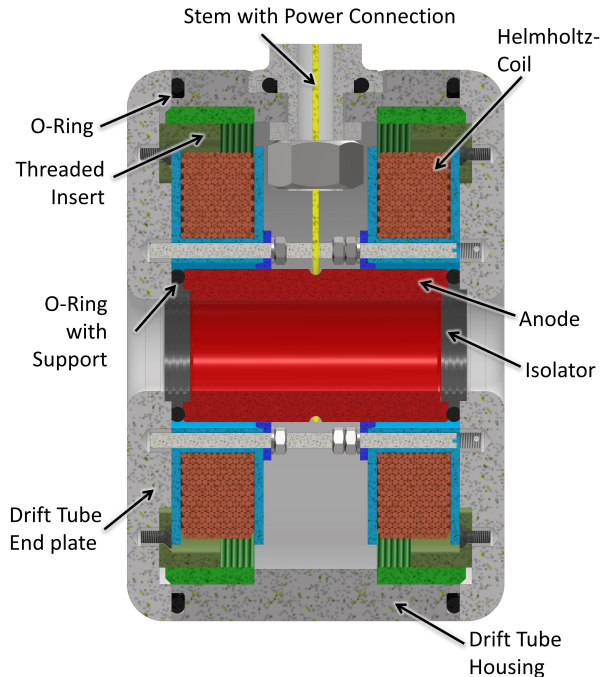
Test setup of a Mobley-drift tube with integrated Gabor lens (anode, isolation, end plate of the drift tube, Helmholtz coil) into a drift tube of a linear accelerator.
